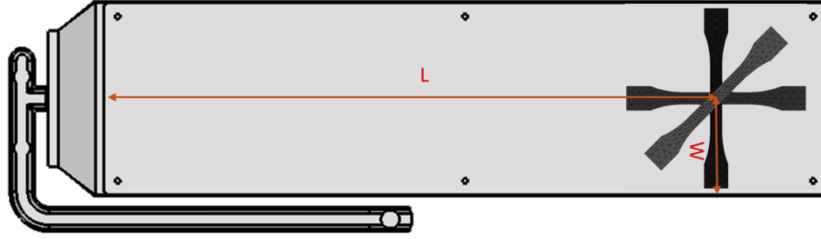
Geometry of the injection molded plaques and the uniaxial samples cut at different orientations.
